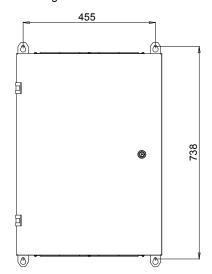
Installation hole dimensions for wall mounting of BCB box of 160/200kVA UPS (unit: mm)
